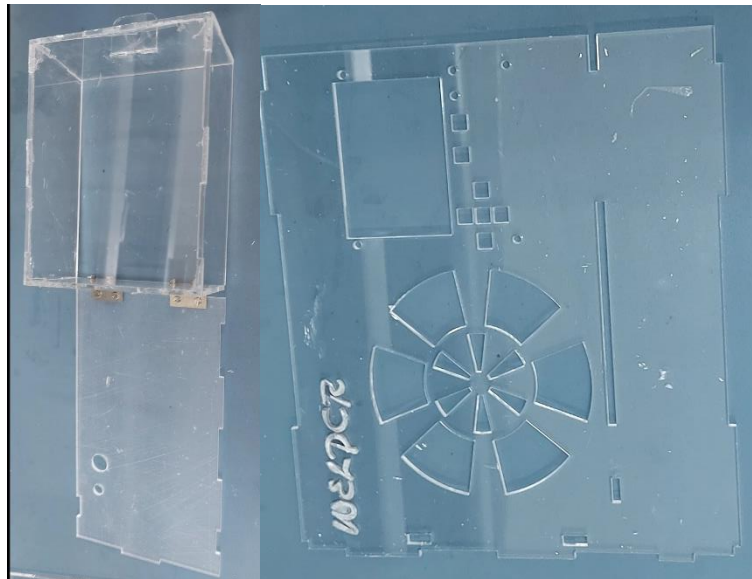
(a) LASER cutting at ELL, IIT Bombay (b) Casing assembly after the LASER cutting
